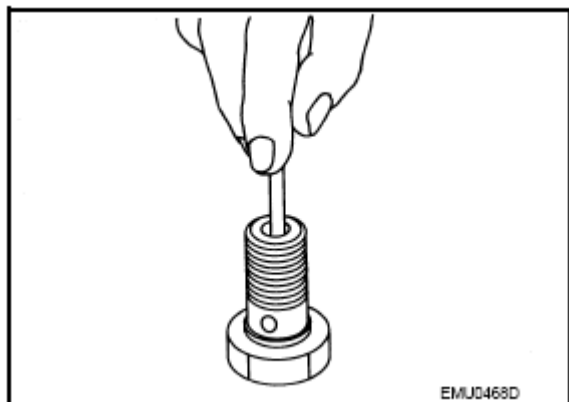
Checking Oil Jet Relief Valve Using Plastic Stick
